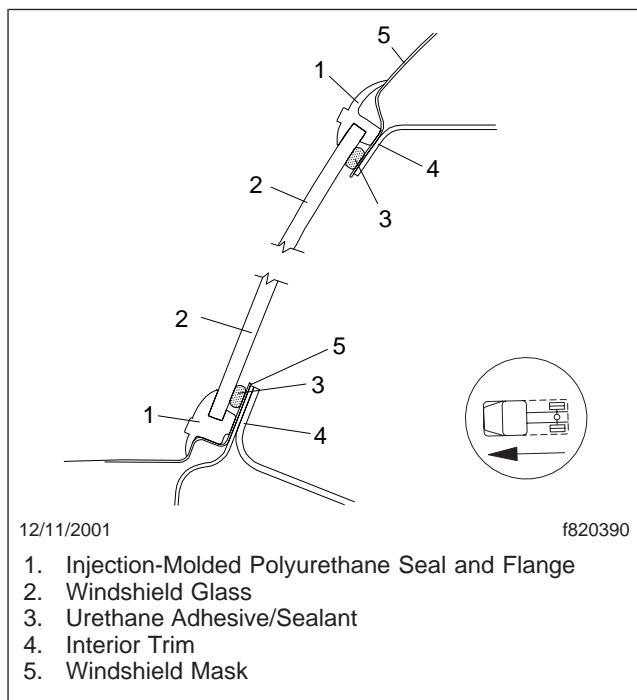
, Encapsulated Windshield Installation (cross-sectional view)
